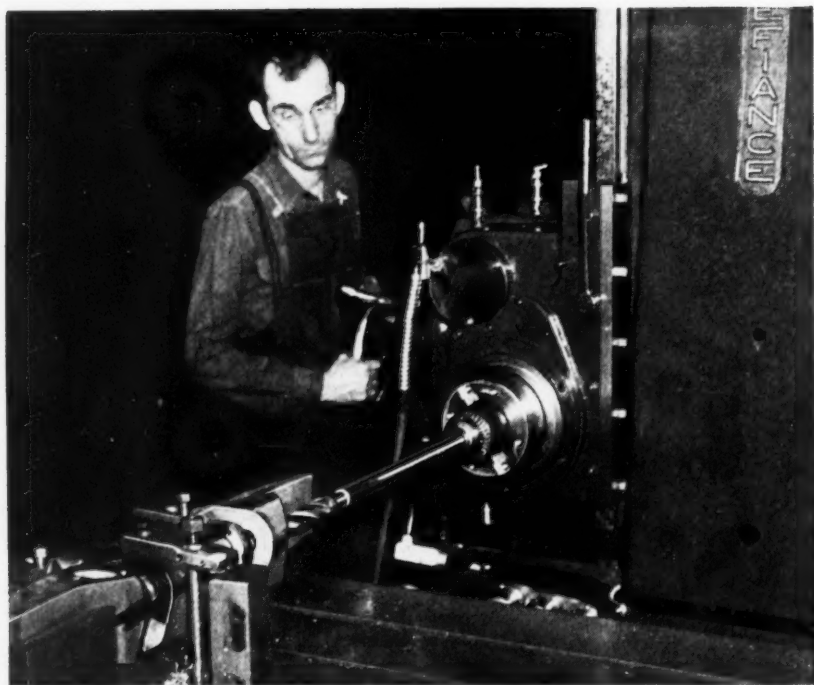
Typical Operation Performed on a Horizontal Boring, Drilling, and Milling Machine, Used for Machining Landing Gear Parts, Engine Nacelles, and Other Work
